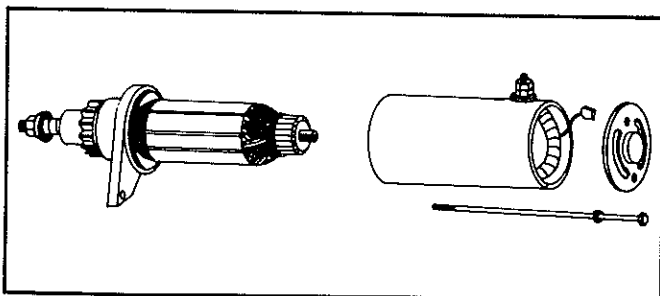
STARTER DISASSEMBLY (SPEC A)
